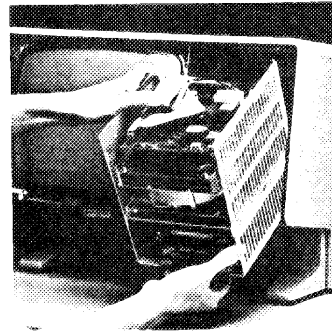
When removing the disk drive assembly take care not to snag or overextend the drive cables. There's not much slack!
